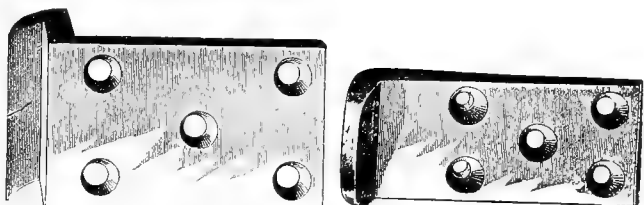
Table Hooks. Dayton Manufacturing Company.
